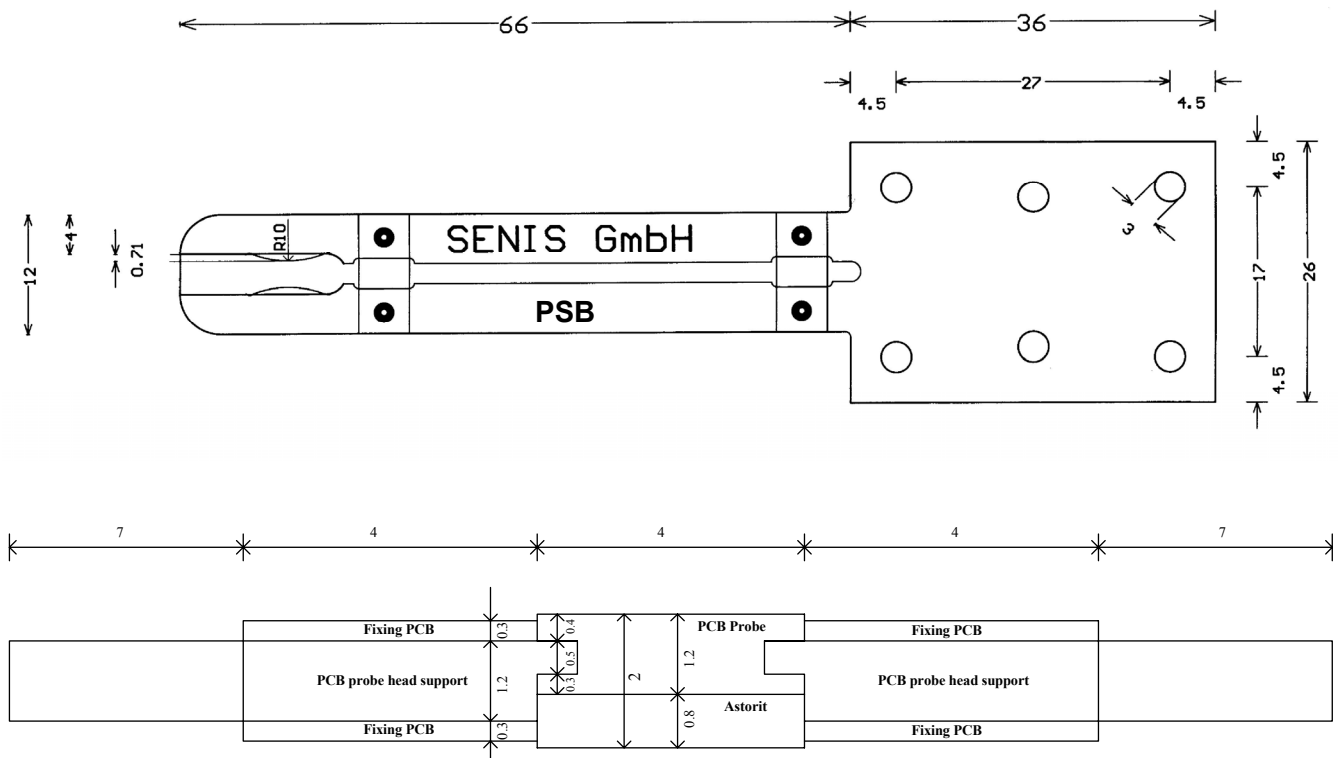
Dimensions of the PSB probe head support (a – Top view, b – Front view). All dimensions are in millimeters.
